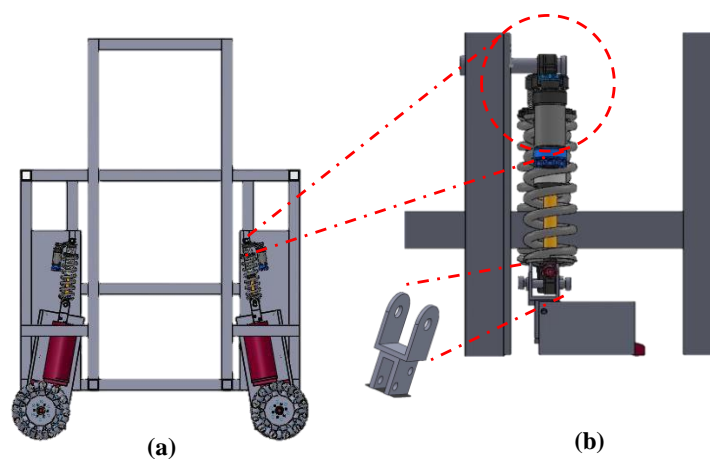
Absorber and Suspension system design for MHeLFAGV Chasis Design: (a) MHeLFAGV frame view, (b) zooming view on absorber mounting
